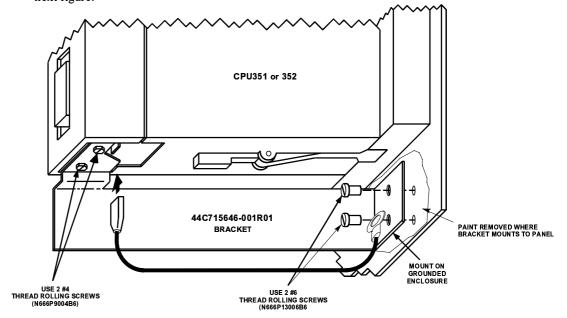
CPU 351 or 352 - Mounting the Shield Grounding Bracket and Wire
